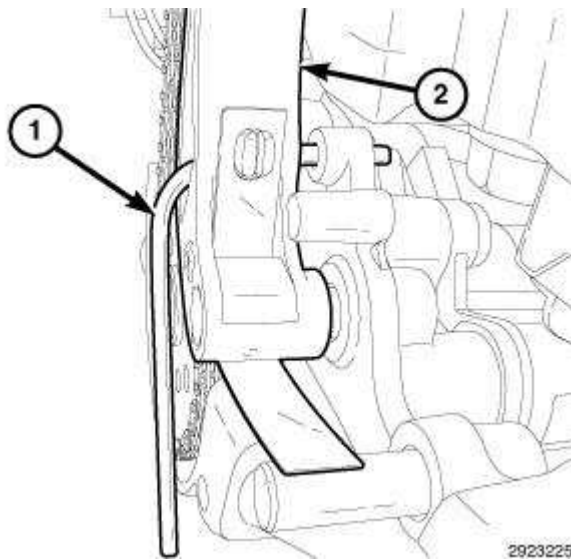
Oil Pump Chain Tensioner & Retaining Pin
